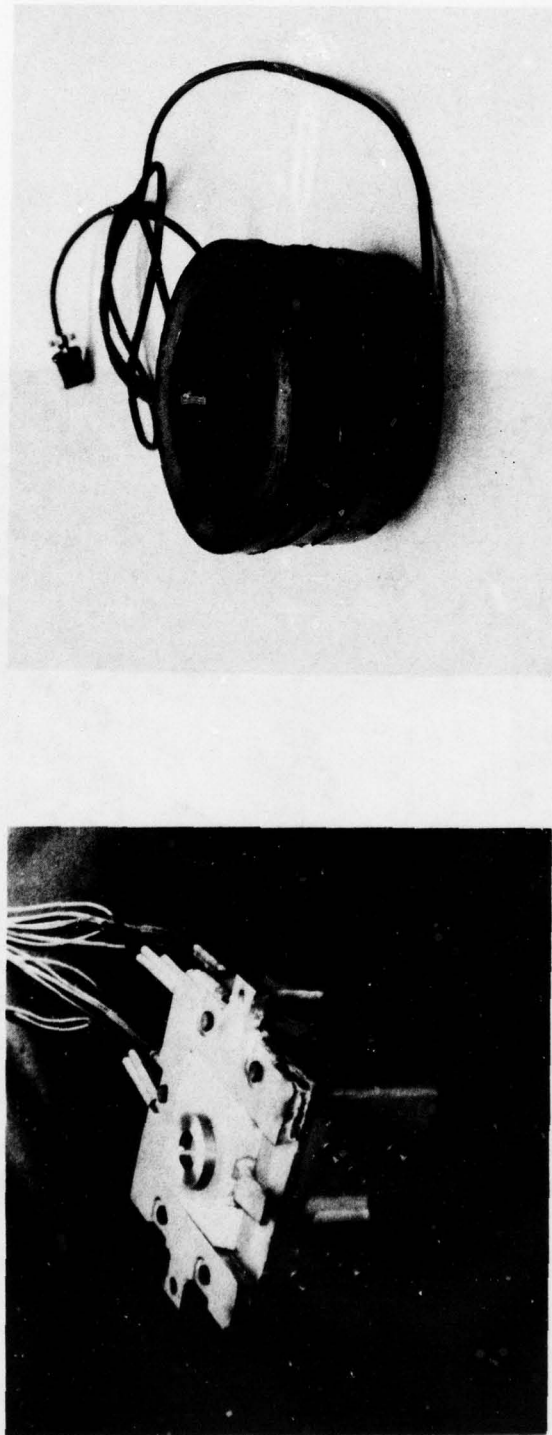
The Lower Die Assembly Shown in a) Rests on a Water Jacket Over the Load Cell. a) Ring Specimen on Lower Die of the Forging Press. The Cartridge Heaters Can Be Seen Protruding from the Back of the Die. b) Load Cell Used to Measure Forging Loads
